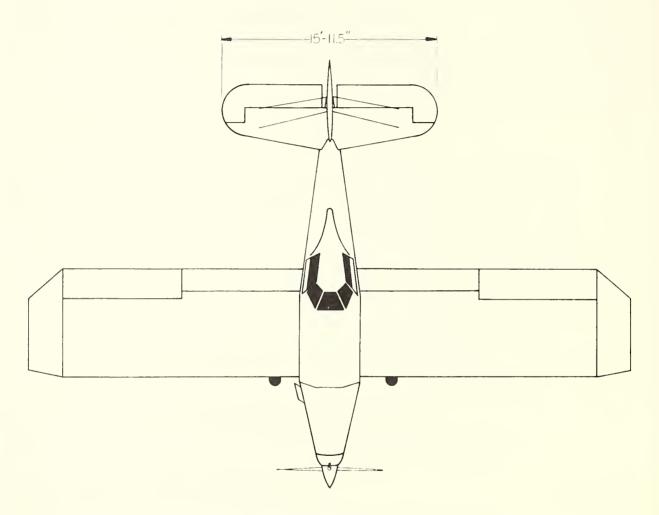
Dimensions of Marsh Turbo Thrush, top view.
